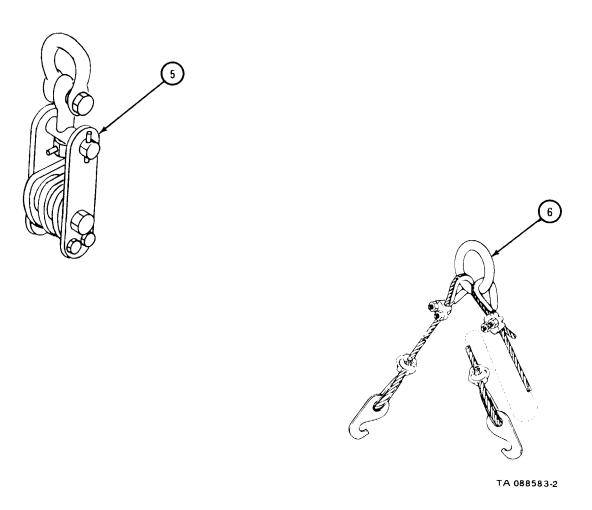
Wrecker Tools and Equipment (M543A2) (Sheet 2 of 2)
